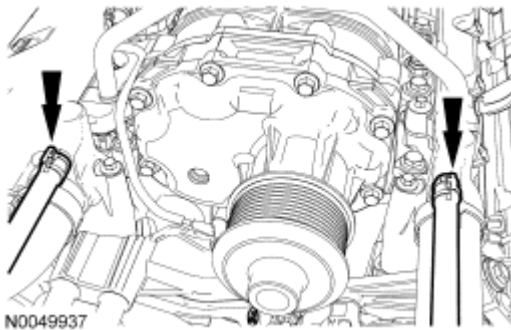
Locating Coolant Vent Hoses From The Intake Manifold
